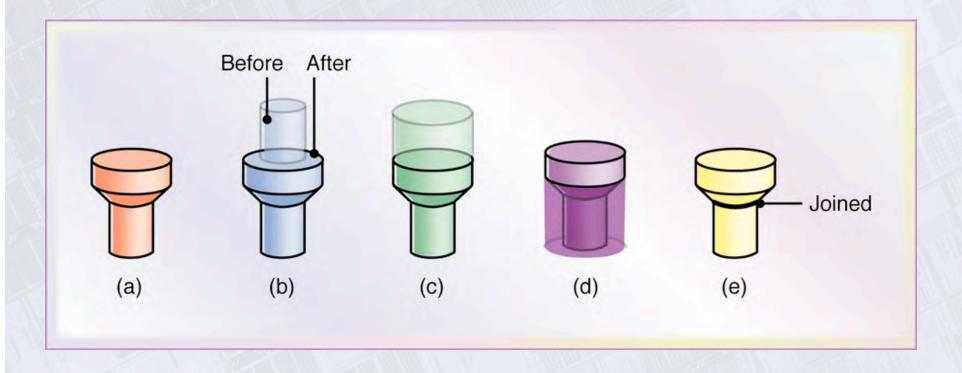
Various methods of making a simple part: (a) casting or powder metallurgy, (b) forging or upsetting, (c) extrusion, (d) machining, and (e) joining two pieces
